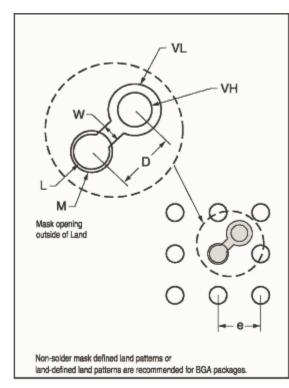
Suggested Board Layout of Soldered Pads for BGA Packages(1)
